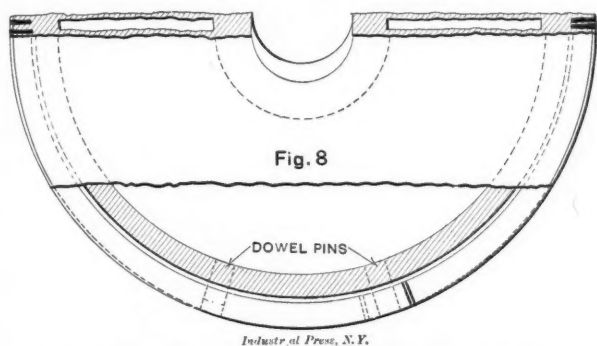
Ring Doweled to Piston so that Joint comes at Bottom.
